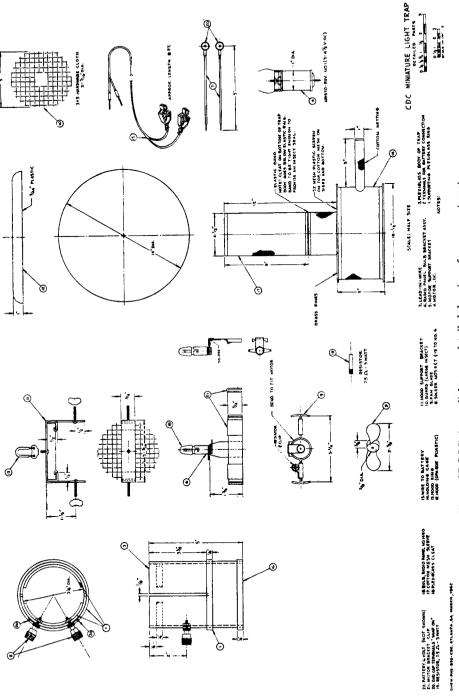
CDC Miniature light trap, detailed drawing of component parts.
